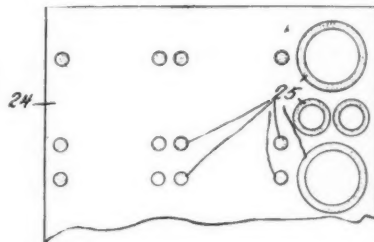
Machine for applying gum to paper may be adjusted to cover whole surfaces or predetermined spots
